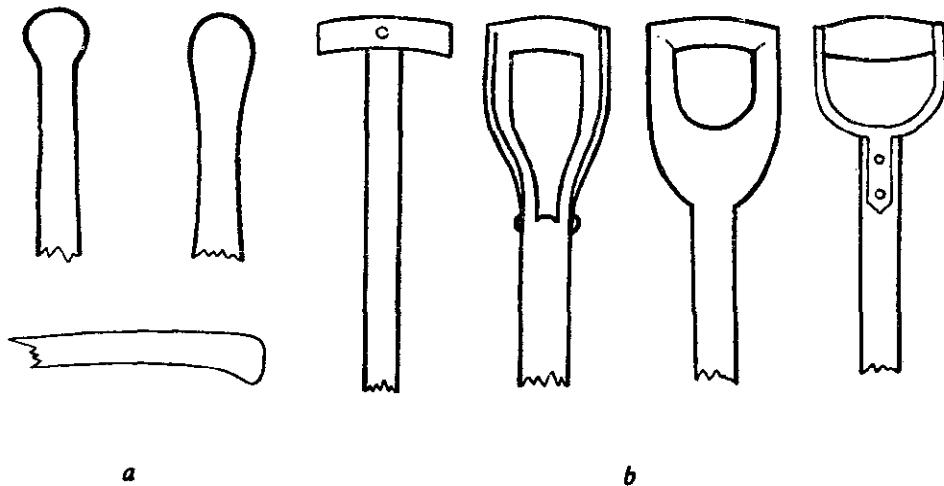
Handle tops: (a) ball point, knob and a simple enlarged top; (b) T, Y and D types.
